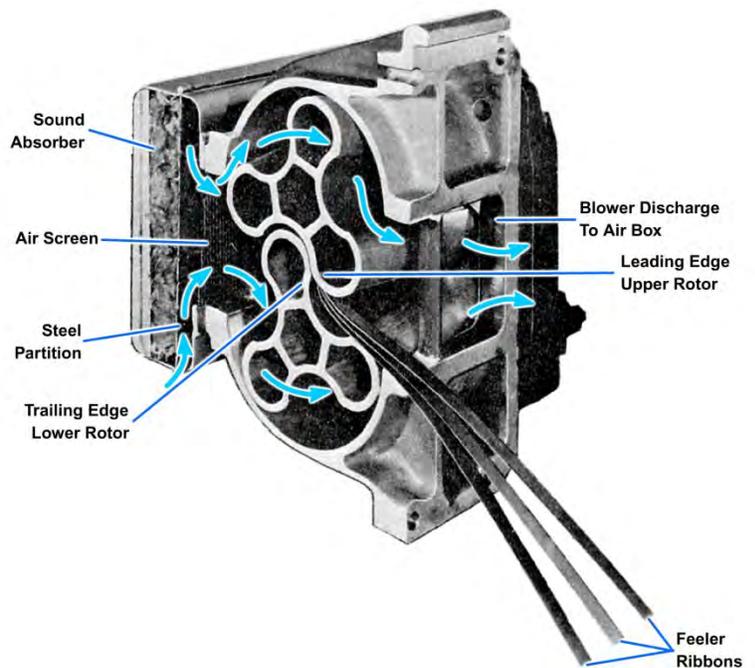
Checking clearance of positive displacement blower lobes.
